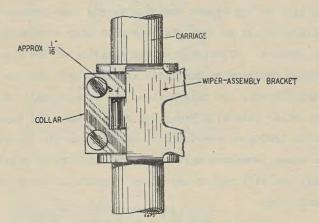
SETTING OF WIPEB-ASSEMBLY LOCATING COLLAR
